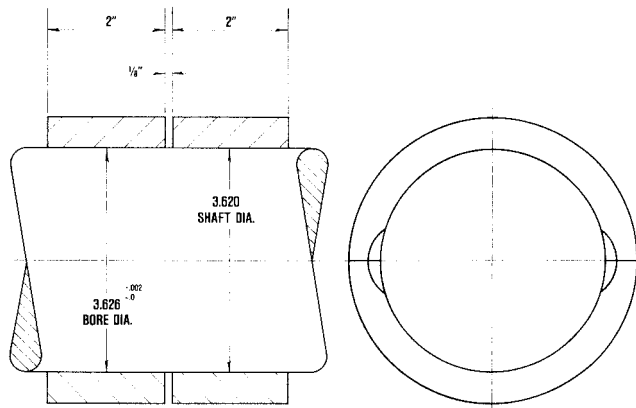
Double-Land Plain Cylindrical Journal Bearing.
